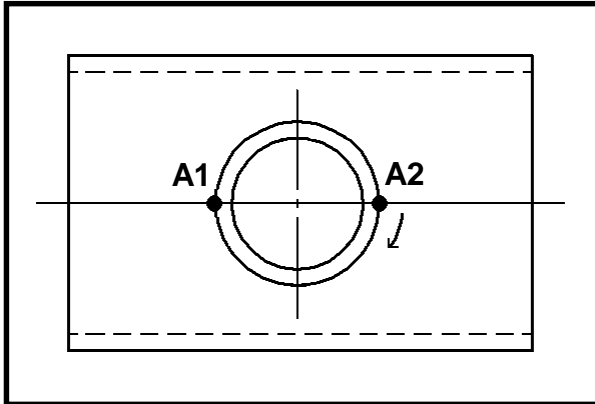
Weld Starting Position for On-center nozzles.
